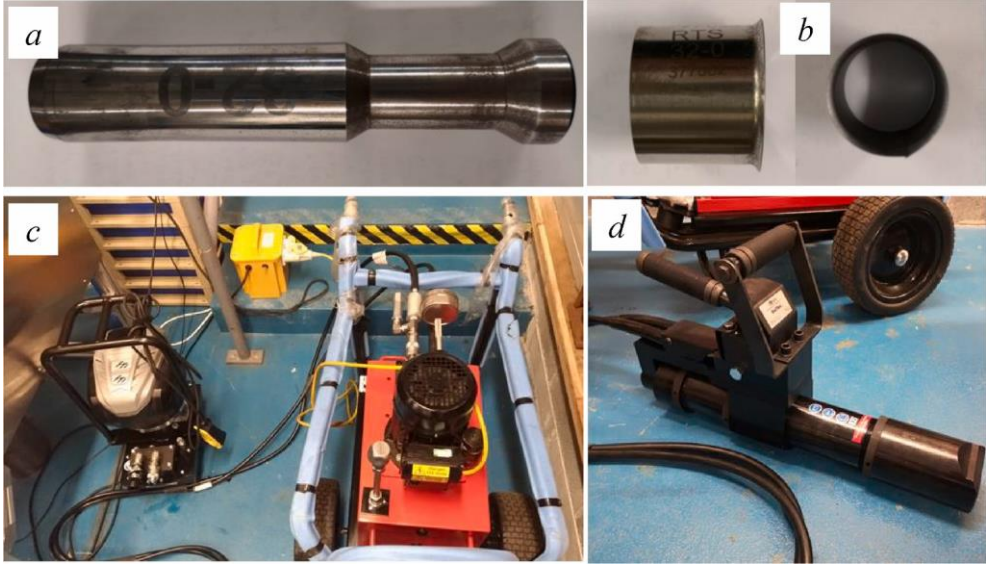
FTI's equipment: tapered mandrel (a); self-lubricated split-sleeve (b); power units (c); pulling unit (d).
